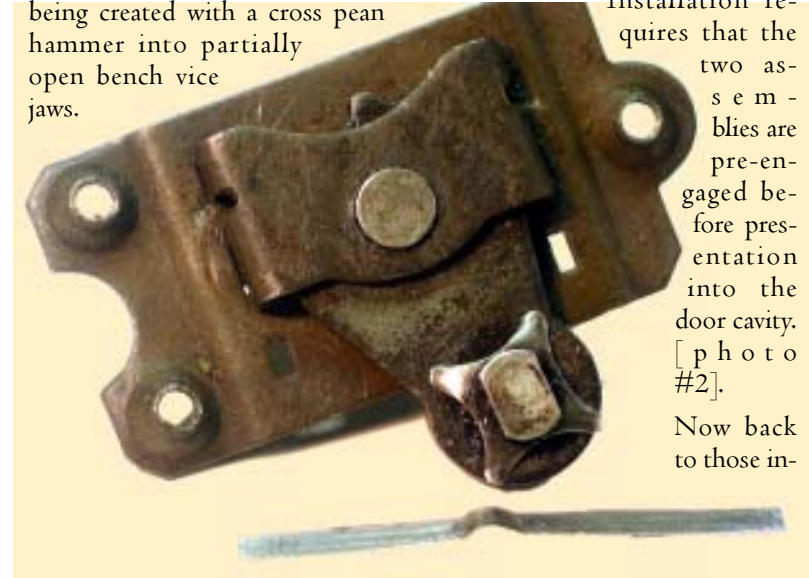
shows a spring with a central engagement notch. This I cut from springy stainless steel 5mm wide x 160mm long. The notch being created with a cross pean hammer into partially open bench vice jaws.
